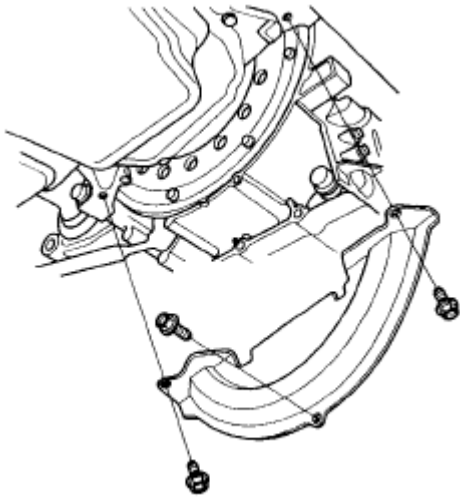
Identifying Lower Torque Rod Bracket
